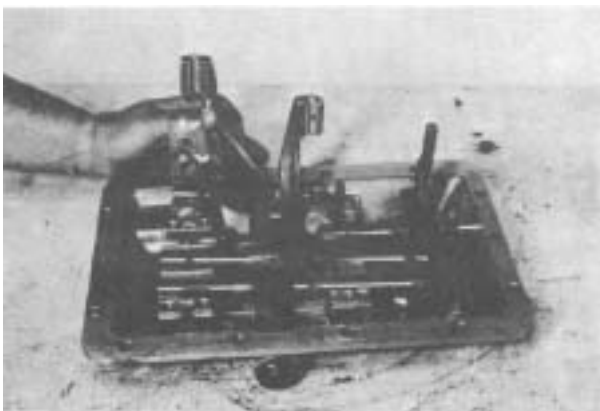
Position 4th & 5th shift rail and fork assembly in rail groove over mesh lock ball and spring.
